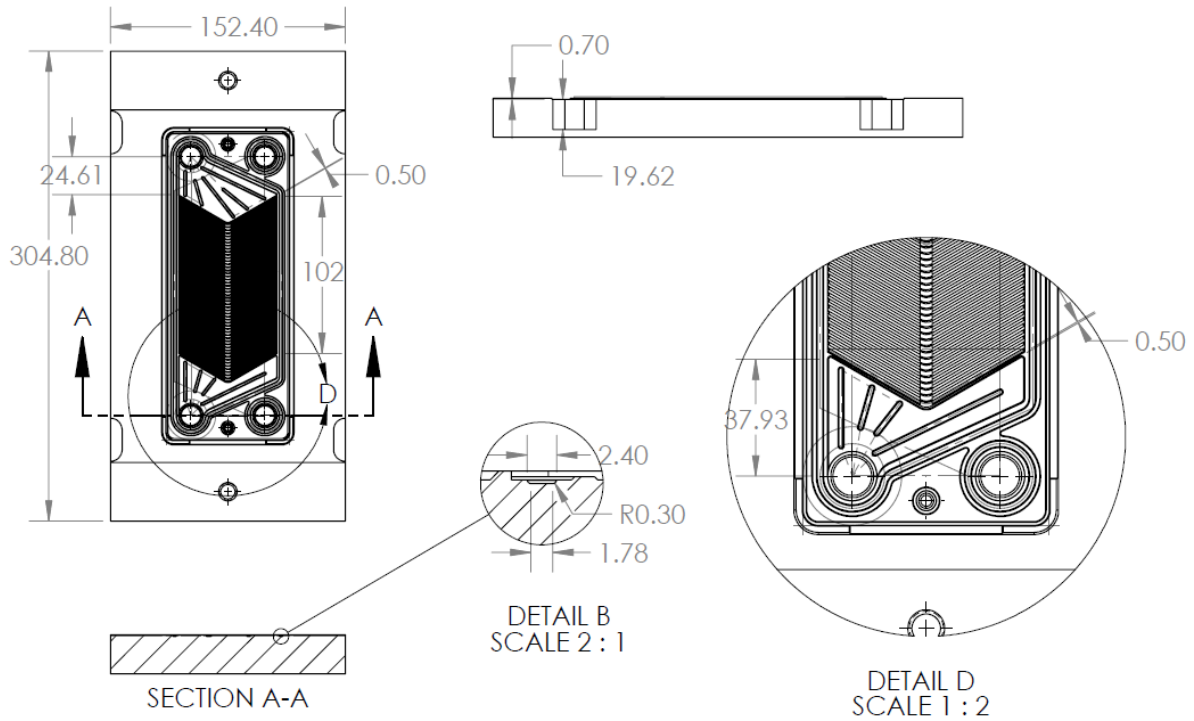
Drawing of the chevron-die for graphite plate heat exchanger (a)
